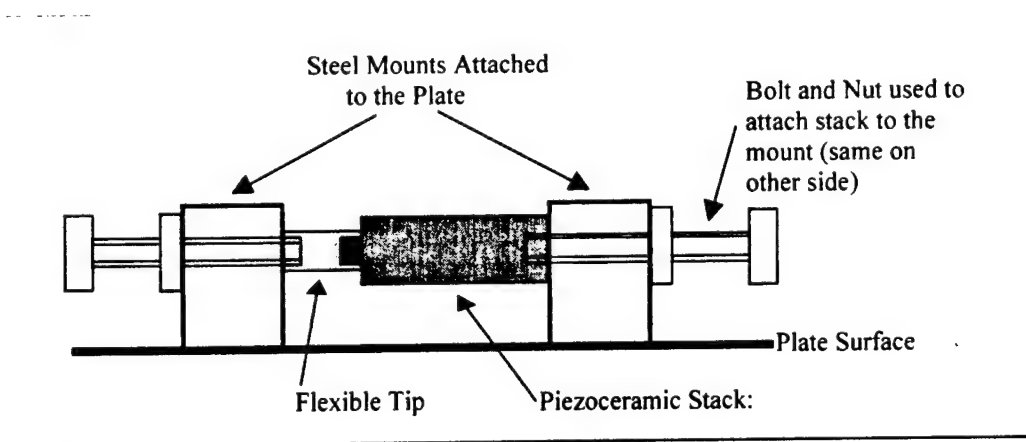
Sketch of Piezo-Stack Actuator Assembly
